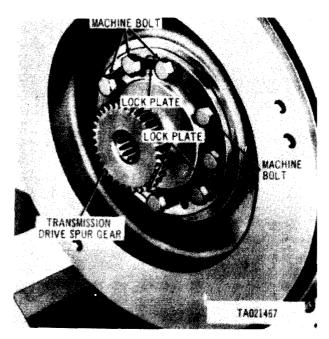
Removing or installing transmission drive spur gear, model AVDS-1790-2C and AVDS-1790-2D engines.
